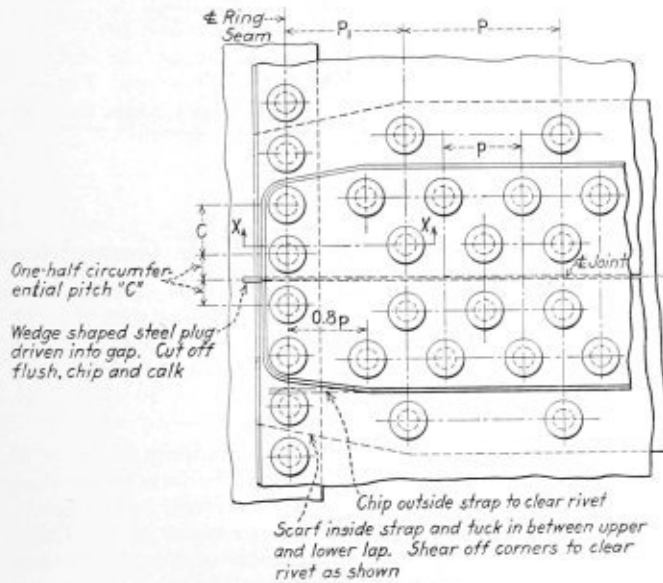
(a).—Outside Seam Construction of Double Butt Strap Joint
